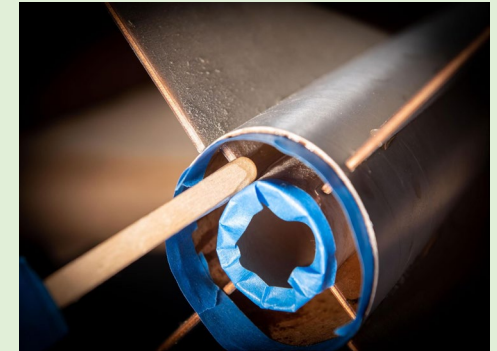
Use Craft Stick or Long Dowel to Apply Epoxy Fillet between Motor Mount and Fin
